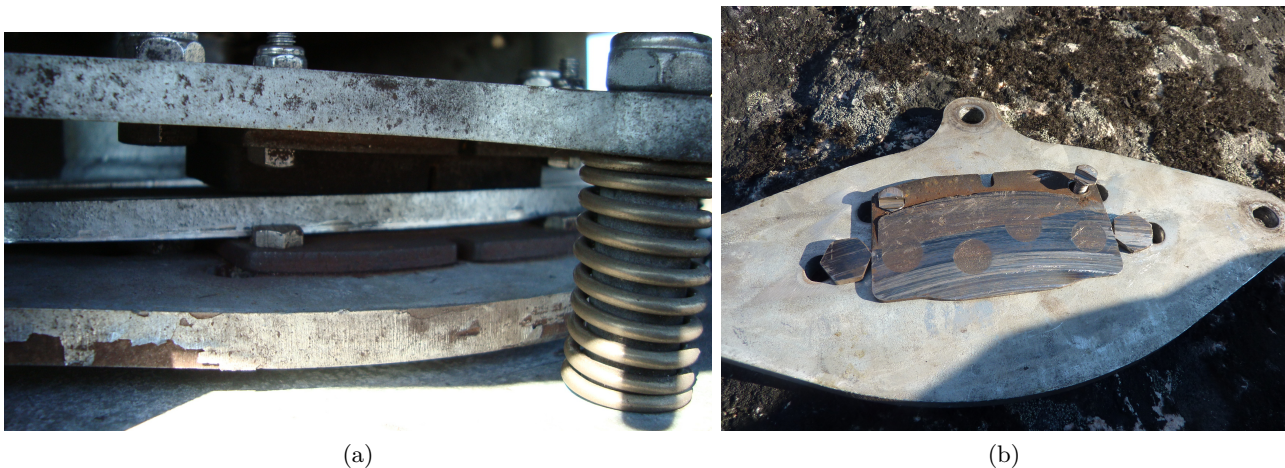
Condition of the braking system before maintenance. (a) Breaking system (b) Breaking pad
